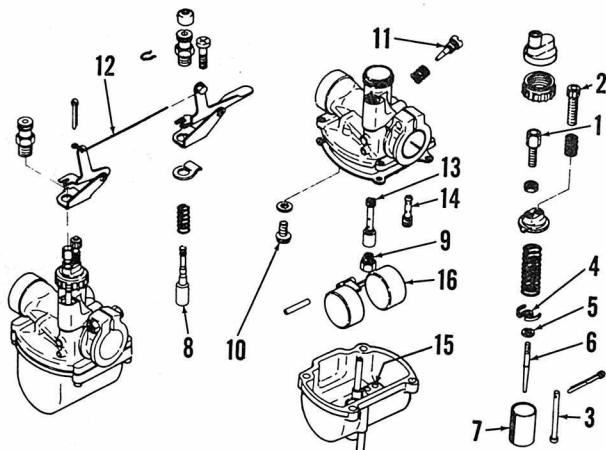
Exploded view of Mikuni VM carburetor. Starting valves for both carburetors are connected with rod (12).
